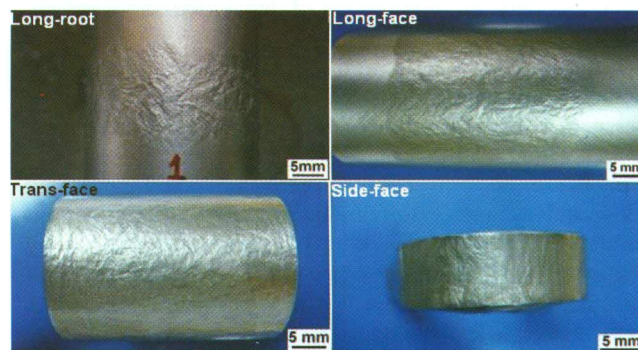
Photo-macrographs of convex surface of (A) longitudinal root bend, (B) longitudinal face bend, (C) transverse face bend and (D) side bend tested welded specimens.
